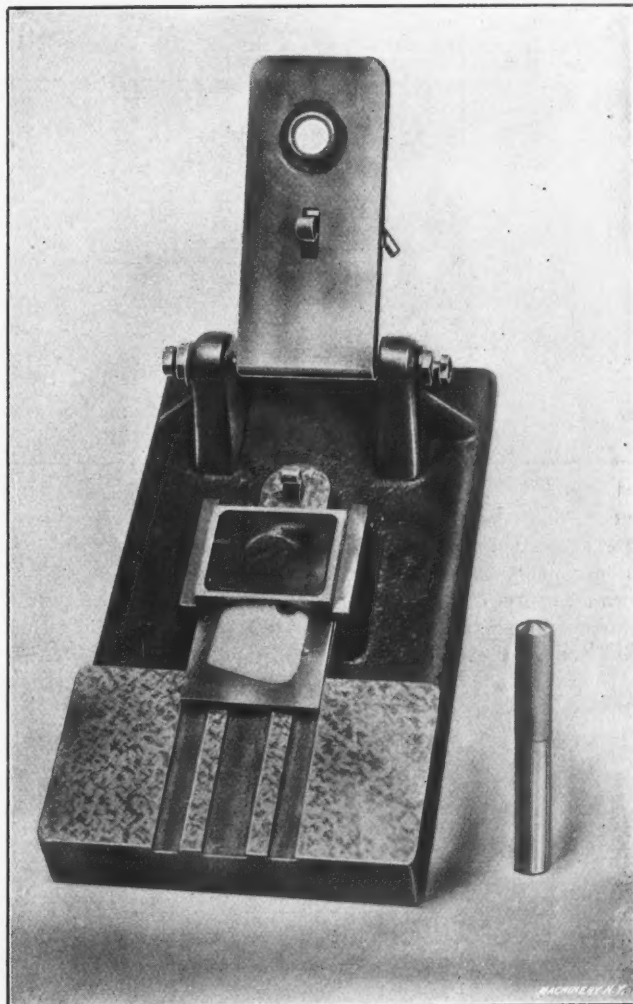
Jig for Molding Wax Formers, with Leaf Turned back showing Eccentric Sprue Cutter, etc.
